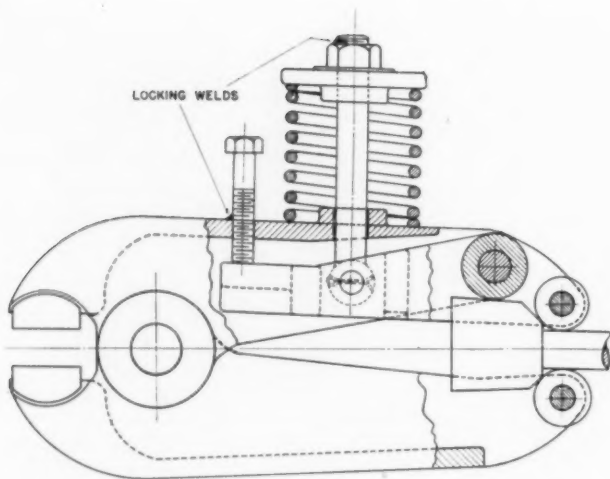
FLEXIBLE GUIDE-CLAMP SAFETY JAW ASSEMBLY
